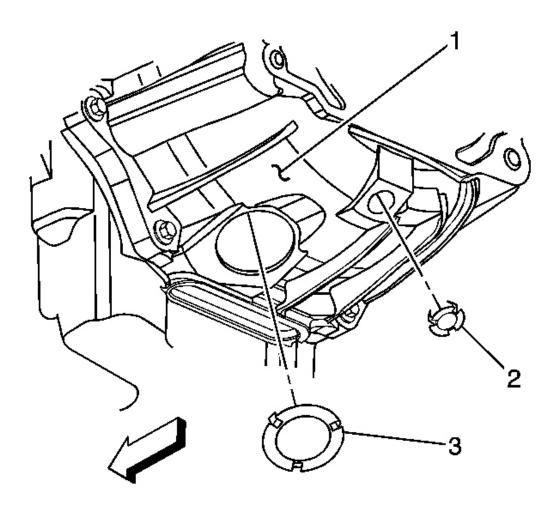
View Of Inspection Plug Courtesy of GENERAL MOTORS CORP.
